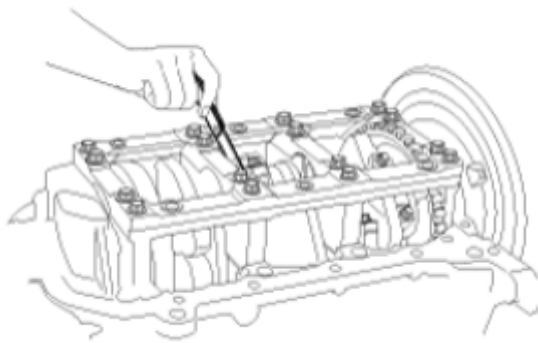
Measuring End Play While Moving Connecting Rod Back And Forth
